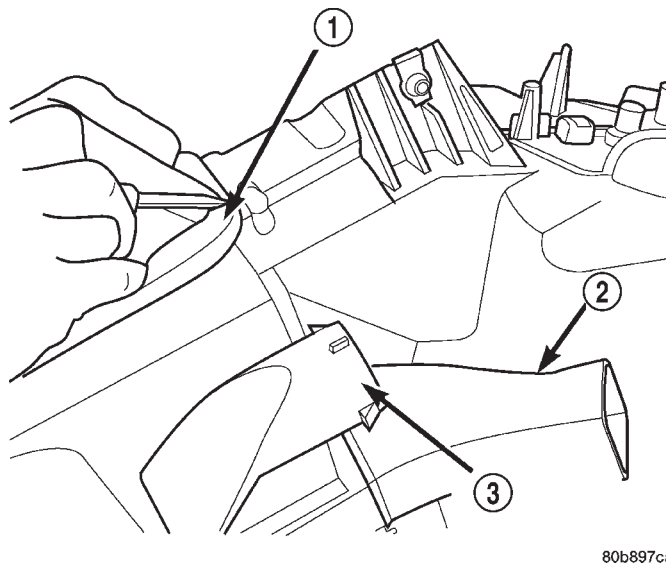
HVAC HOUSING REMOVE/INSTALL
